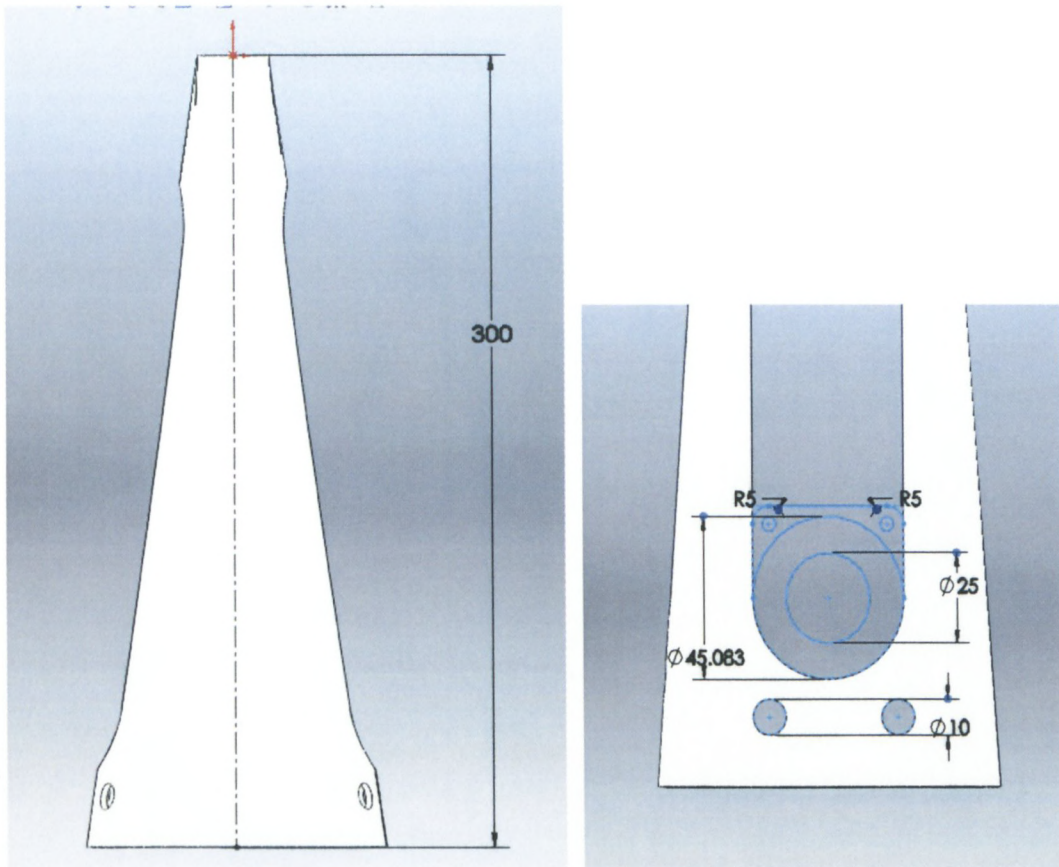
&12: Forearm size and cooling fan emplacement dimensions
